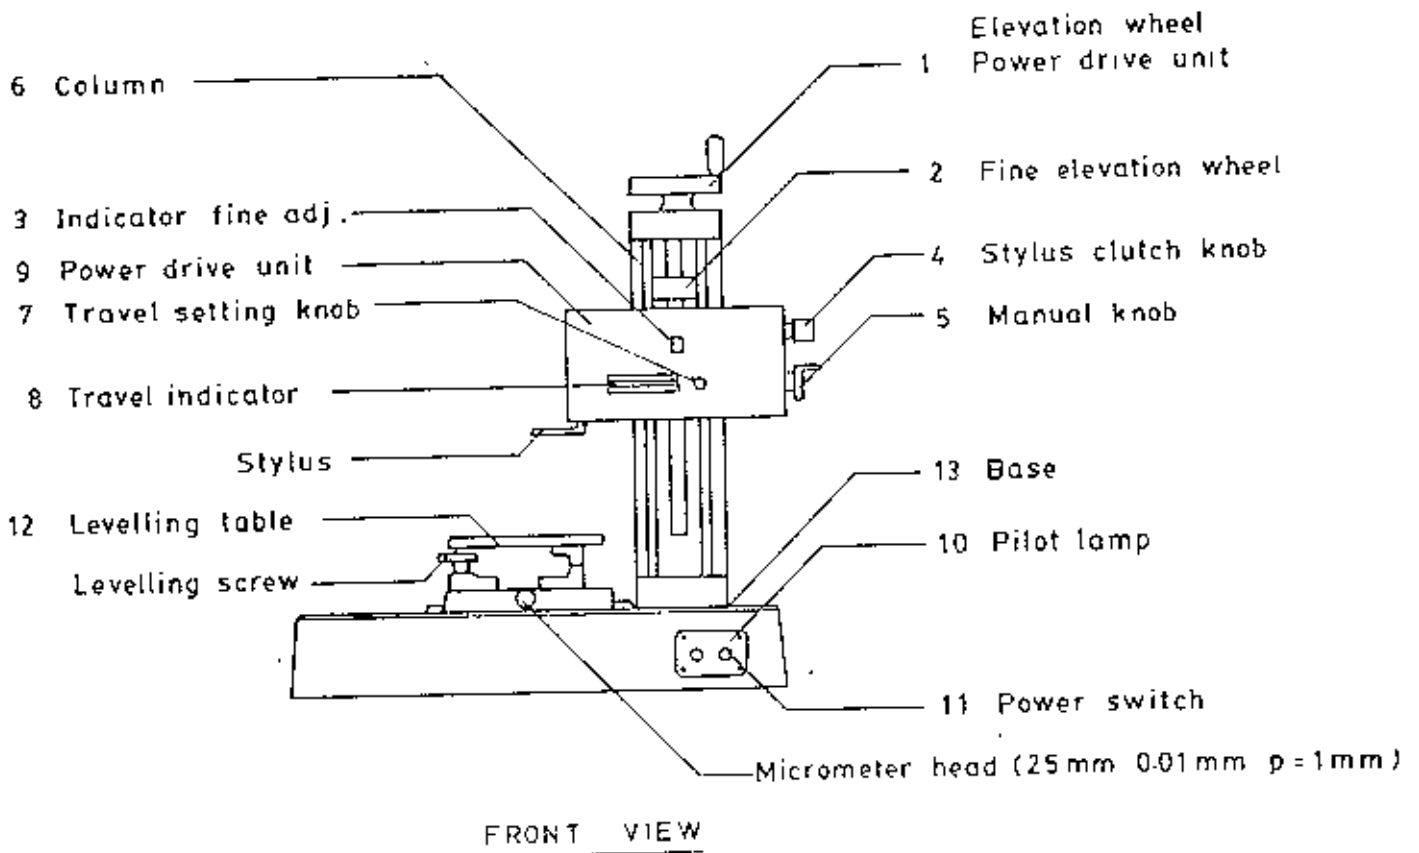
Surface roughness measuring equipment (surf. test AB-5 machine)
